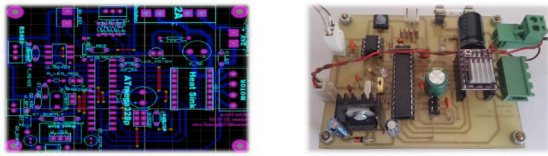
Micromanipulator Drive Unit PCB Artwork and Fabricated PCB
